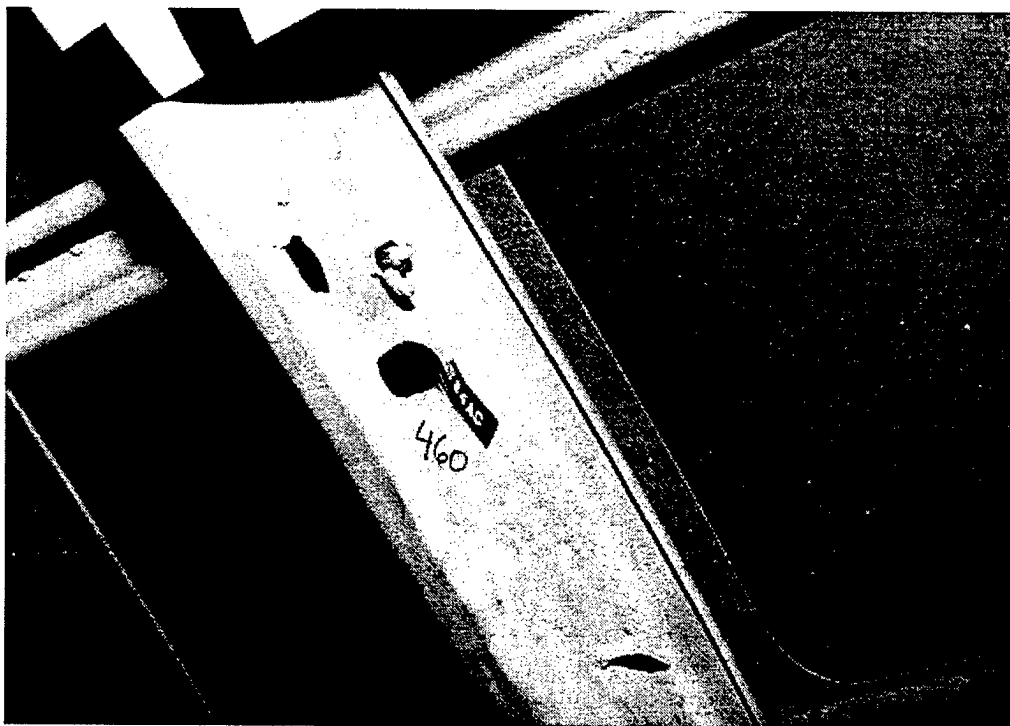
POSTTEST BIN A UPPER RAIL (FS460) DETACHMENT VIEW
